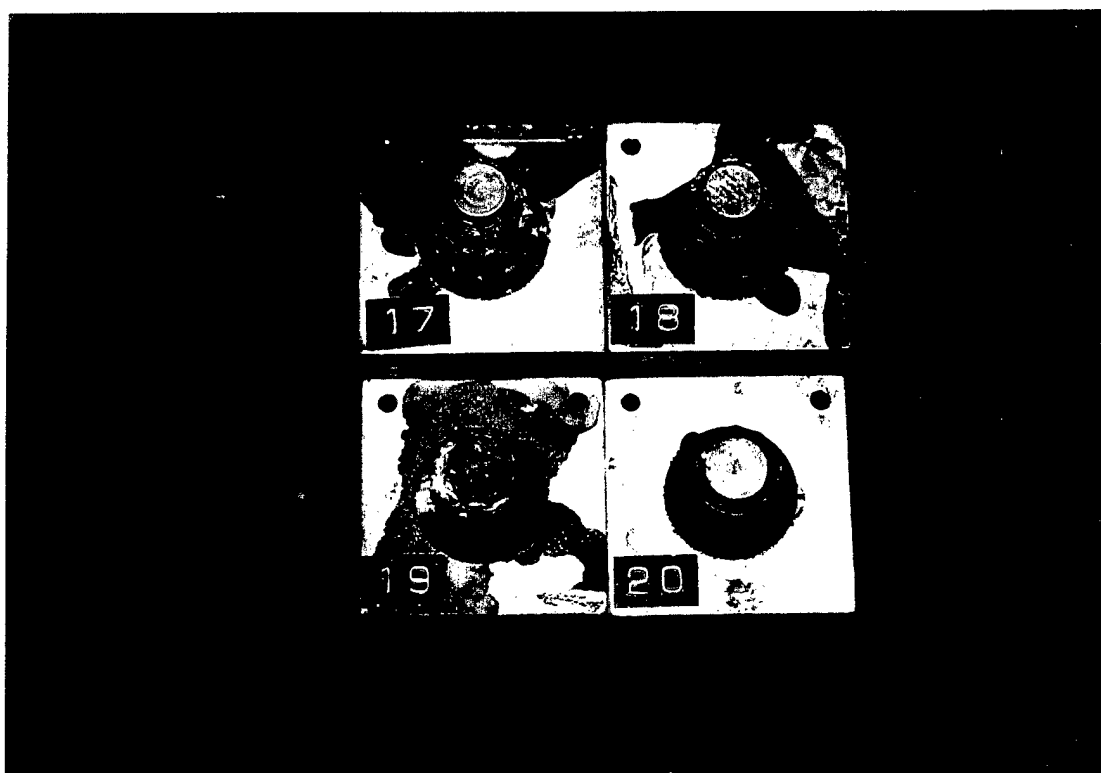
H11 Chromium Hot Work Tool Steel Nuts With IVD Al Coating After 30 Days of Salt Spray. Reduced 25%.
